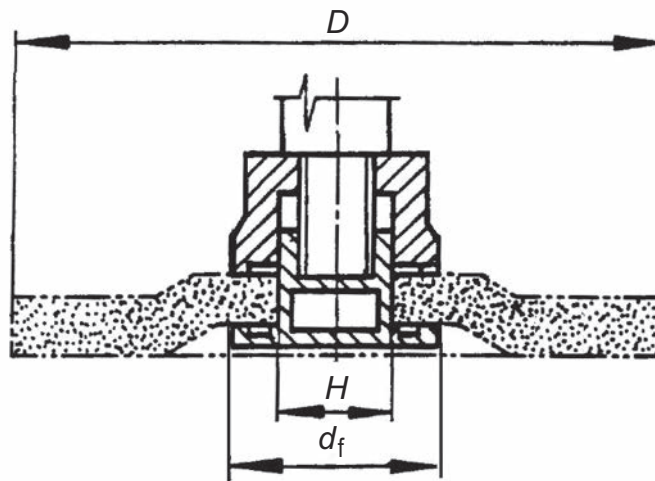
Rear flange with a recess for abrasive products of types 6 and 11 with an insert riveted on an anchor plate
